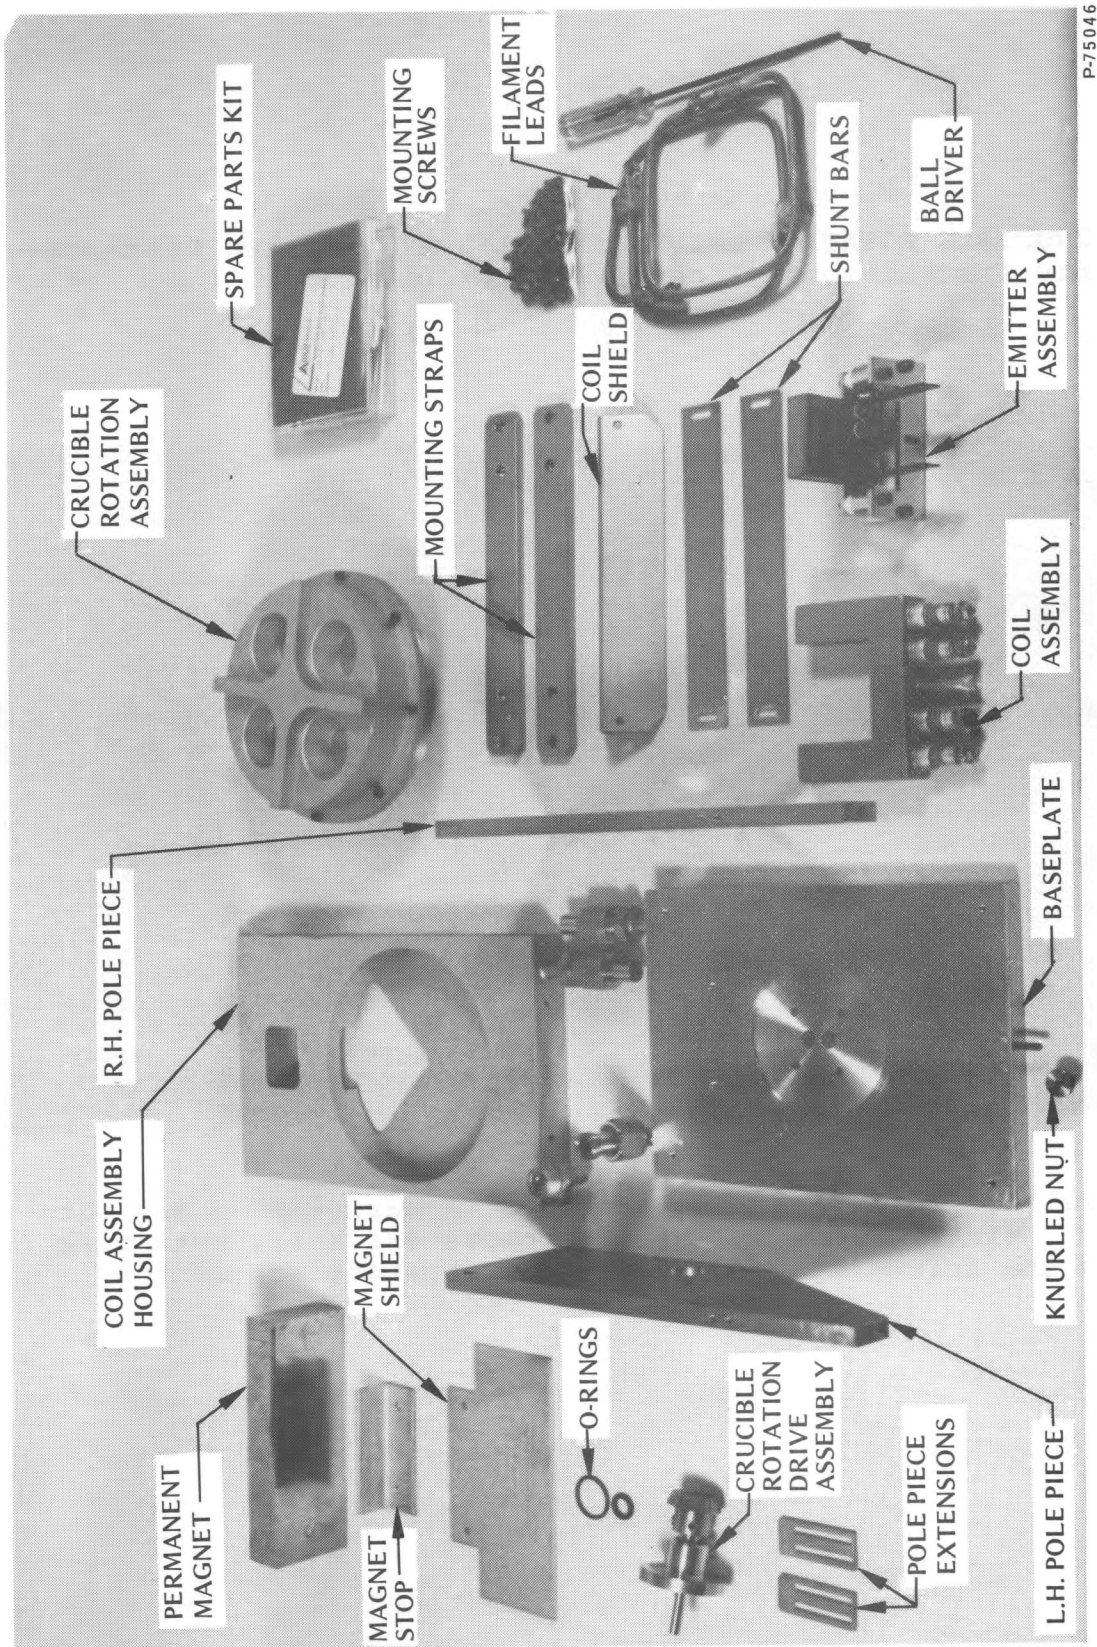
Components of the STIH-270-2M SuperSource. Further disassembly of the crucible rotation drive assembly is shown in paragraph 5.5, and further disassembly of the crucible rotation assembly in paragraph 5.6.
